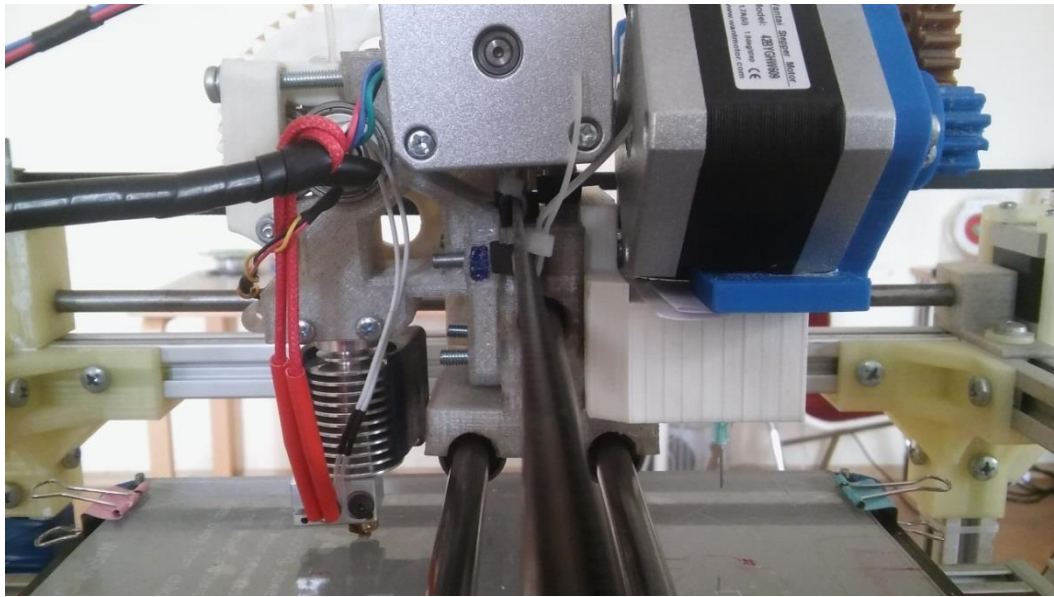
Extruder carriage equipped with direct filament extruder and paste extruder.
